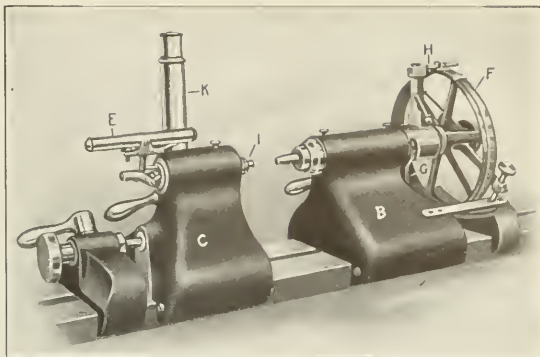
Close View of Newall Machine showing Spirit Level Indicator and Screw Compensator
